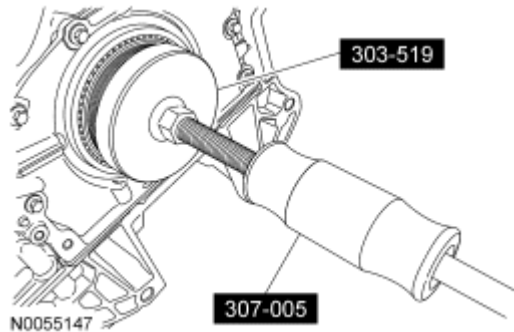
Removing Crankshaft Rear Seal Using Special Tools (303-519) & (307-005)
